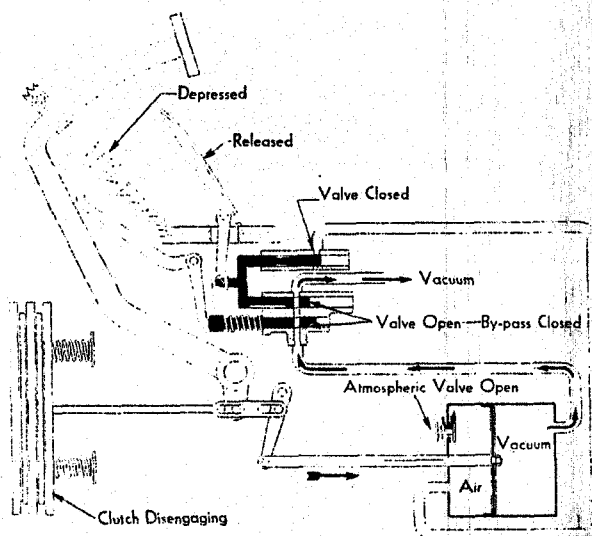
Clutch disengaging. Control button is depressed, opening vacuum line
